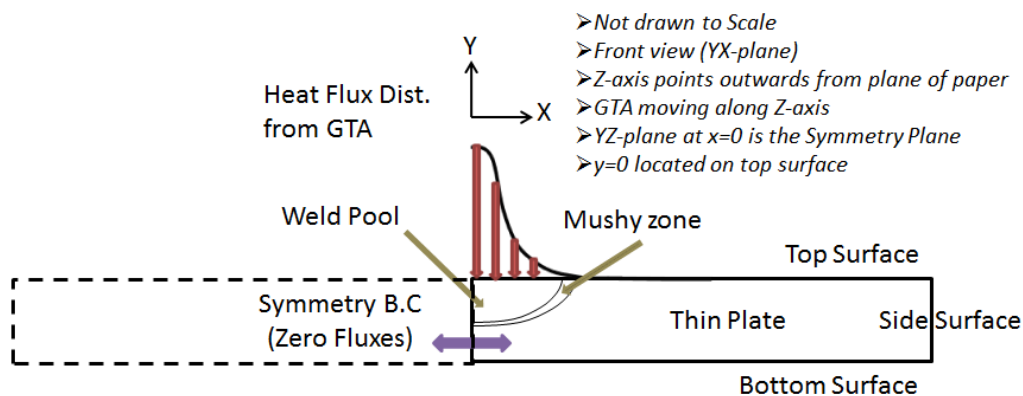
Schematic of a moving GTA welding process.
